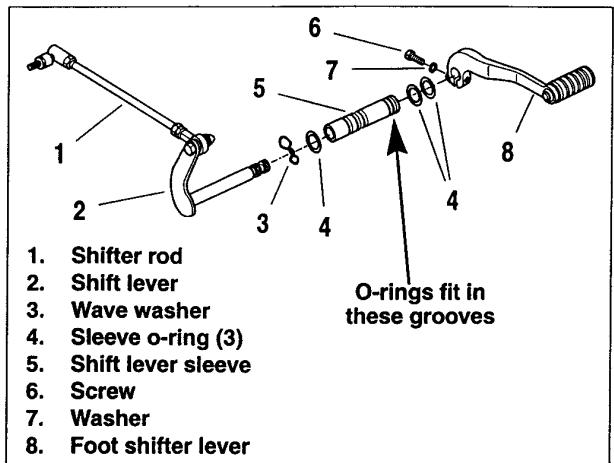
Shift Lever Assembly (All But FXDWG)
